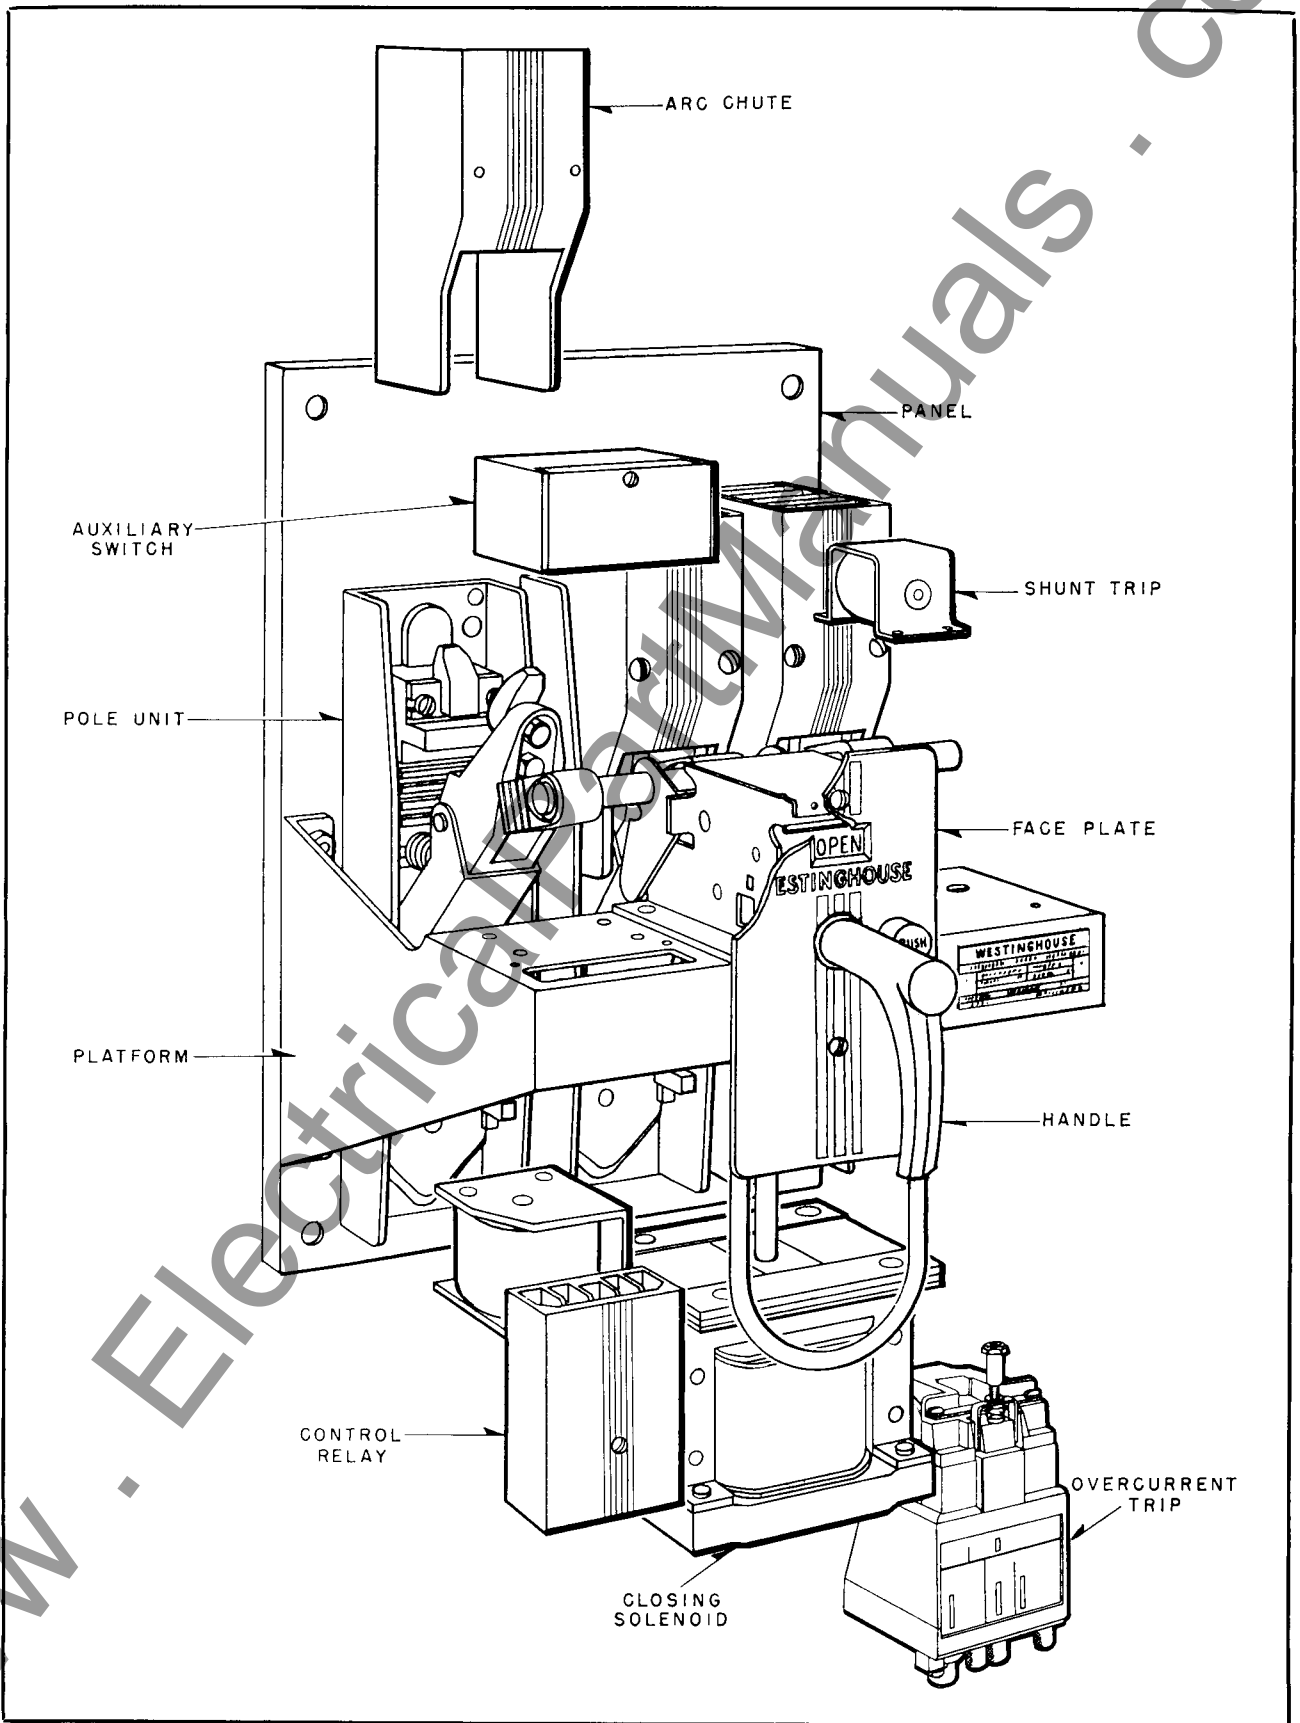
Type "DB" Air Circuit Breaker—Exploded View
